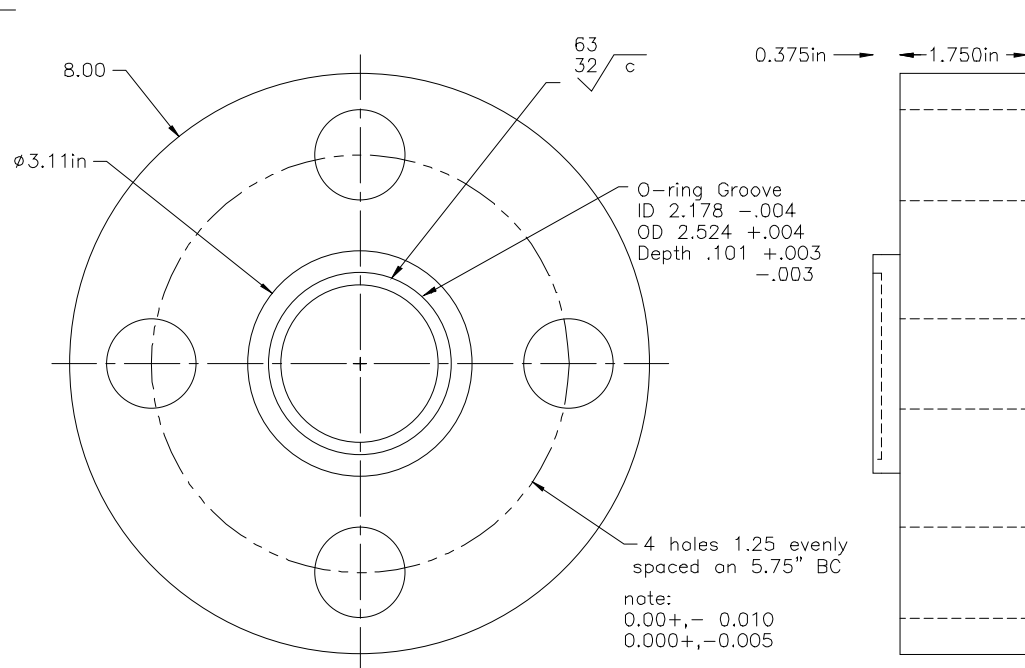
Design drawing of removable flange for metallic seal (vessel cap).
